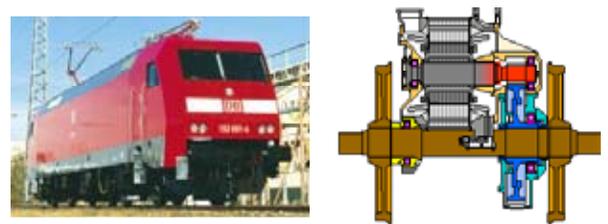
A cargo locomotive Siemens 152 series and wheelset drive by AC motor and by axle-mounted traction motor
